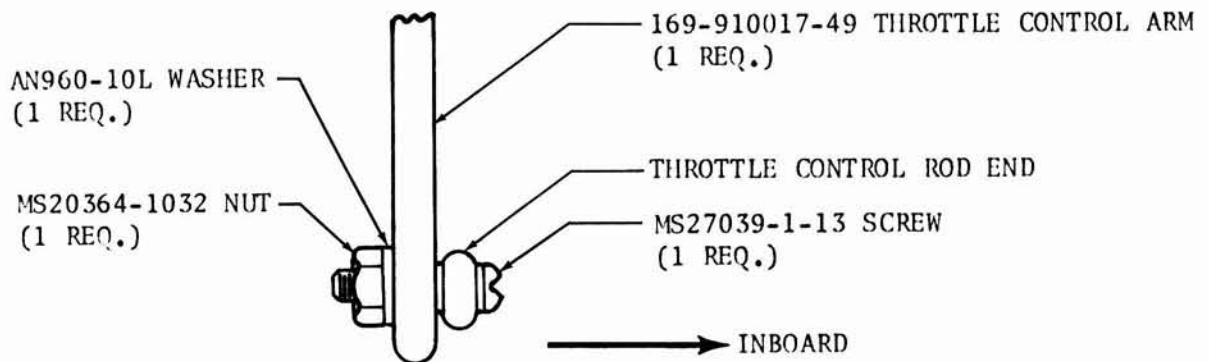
Installation of 169-910017-49 Throttle Control Arm
